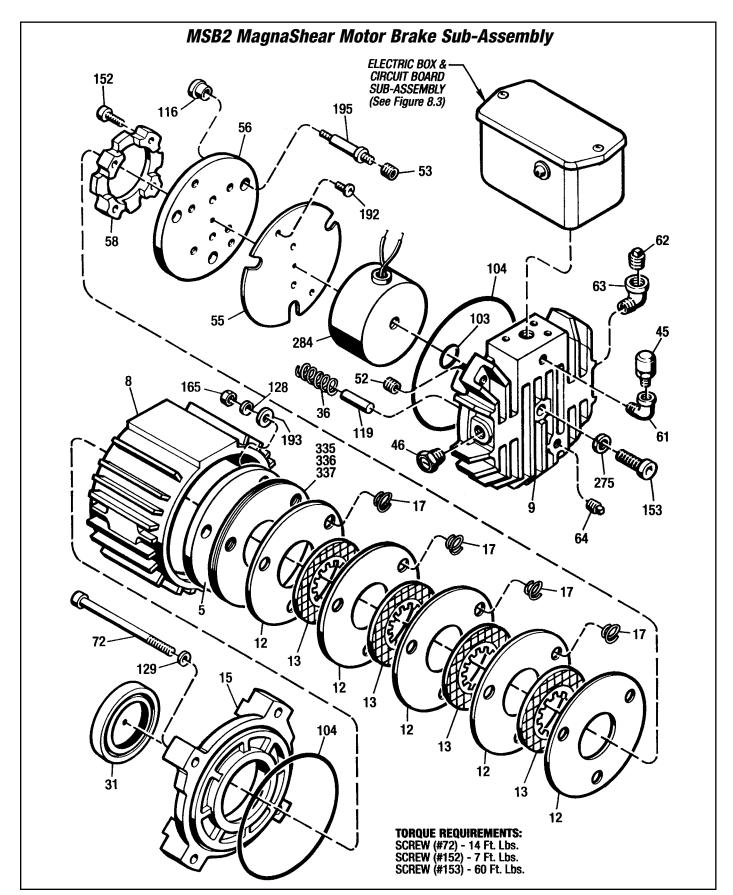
Repair Parts - MSB2 MagnaShear Motor Brake
